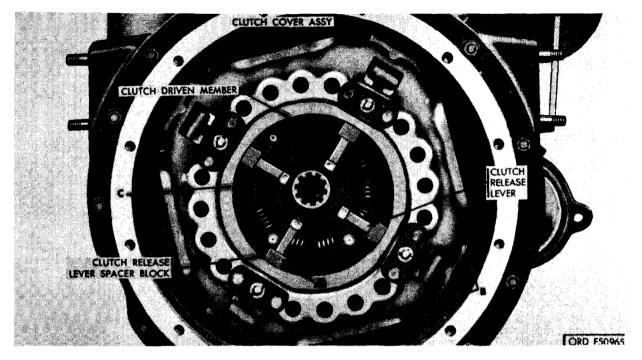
CLUTCH ASSEMBLY - INSTALLED VIEW,
